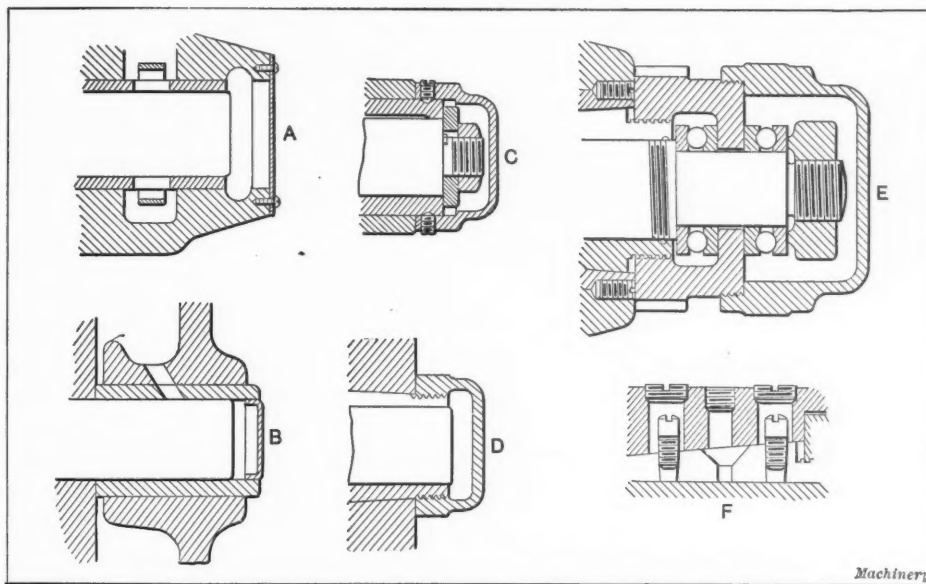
End Covers for Shaft Bearings and Adjusting Nuts
